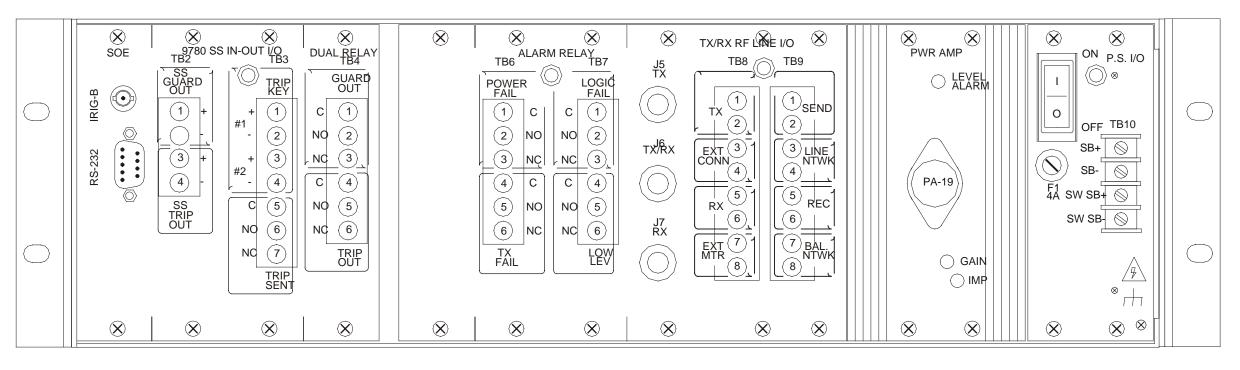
Rear Panel View of Typical RFL 9780 TX/RX Chassis (Drawing No. D-106431-A0
